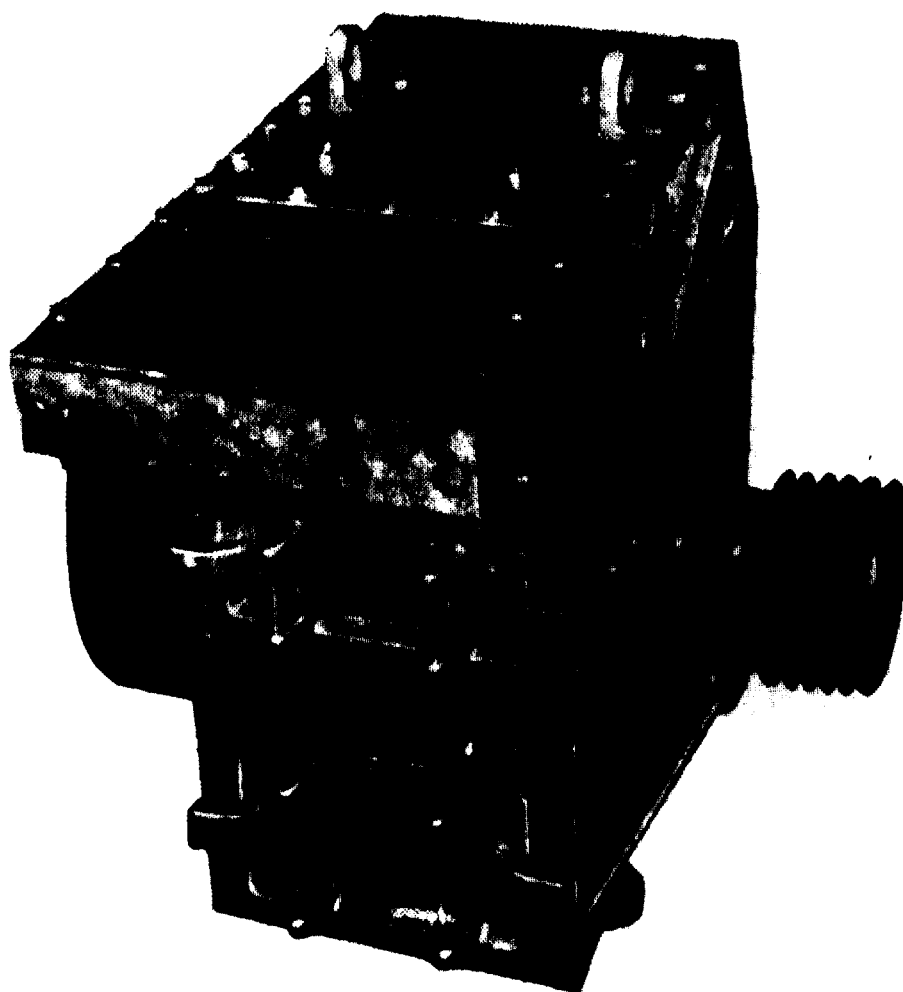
A HAMMER MILL FOR CRUSHING OF LATERITE (FUCHS).
